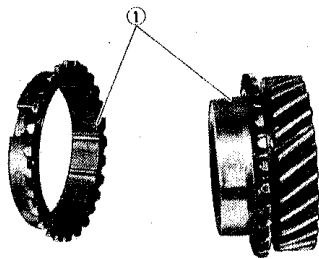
① Checking contacting surface. Chamfered tooth ends of ring (external teeth) and sleeve (internal teeth)
